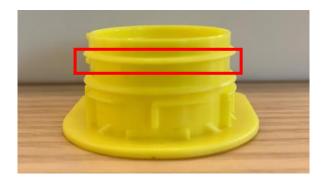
HeliCap[™]26 *Pro with the part attaching to the second edition cap detachment fixture marked.
